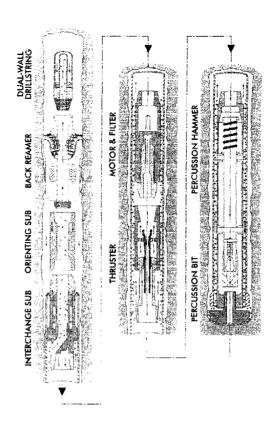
Sketch of bottom hole drilling tool assembly components (Rowley, et al., 1995).
